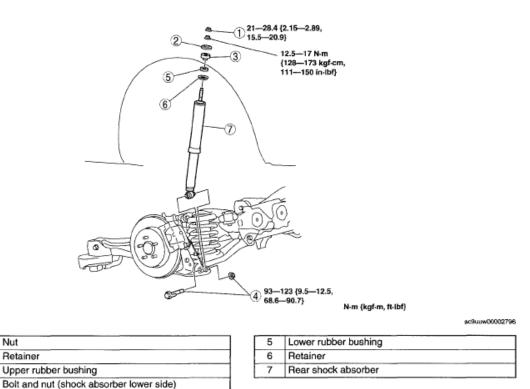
Identifying Rear Shock Absorber Components & Torque Specifications Courtesy of MAZDA MOTORS CORP.
